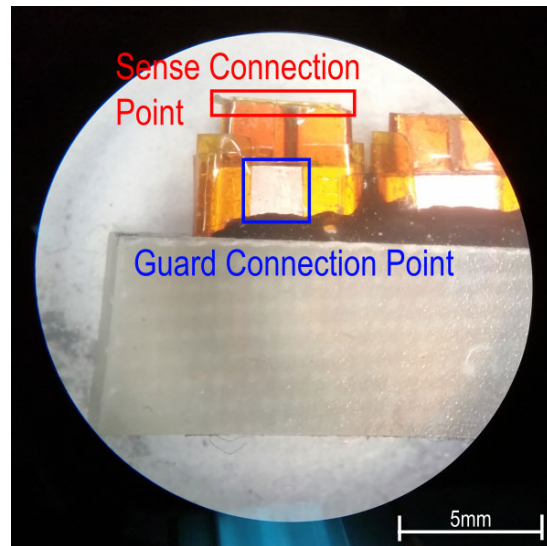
Attachment of electrode array to the drive electronic PCB.
